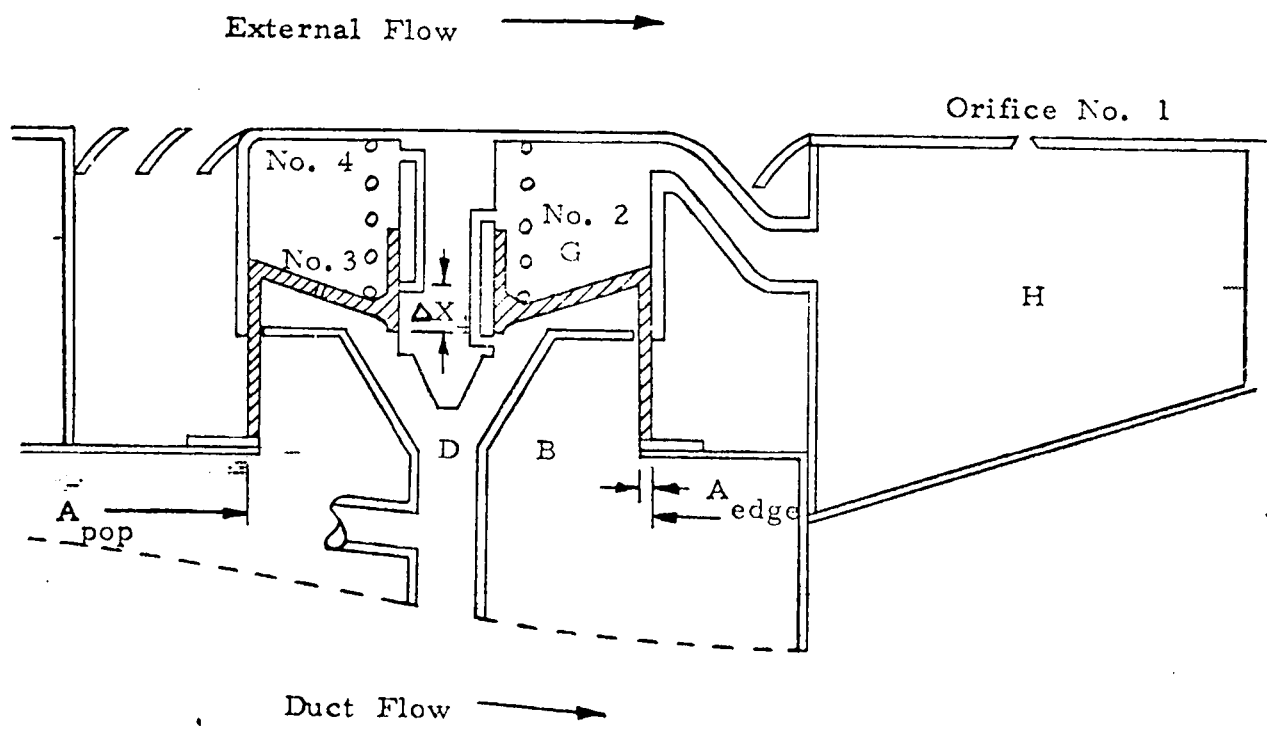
SHIELDED POPPET VALVE SCHEMATIC
